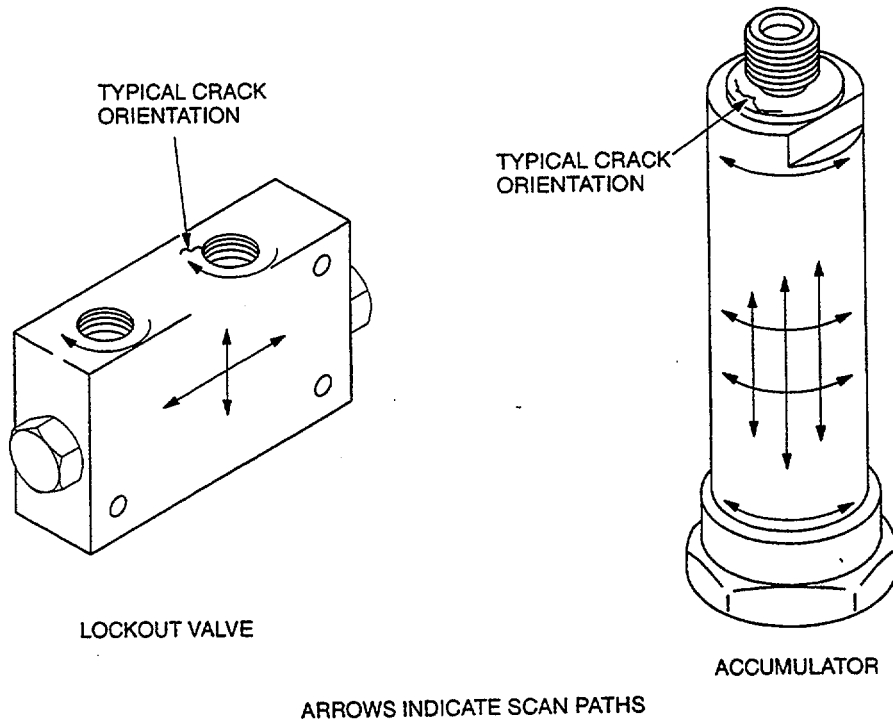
Hydraulic Accumulator and Lock Out Valve Assemblies
